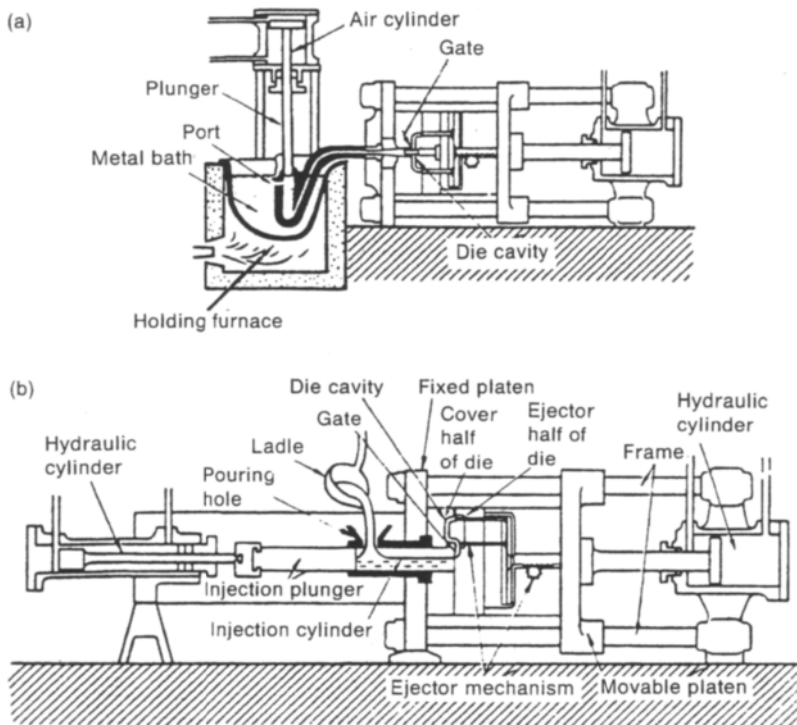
High pressure die casting machines utilizing (a) a holding furnace or (b) a ladle and plunger for filling the die cavity. (Reproduced from *Casting Aluminum*, with permission of Alcan Aluminium Limited.)
